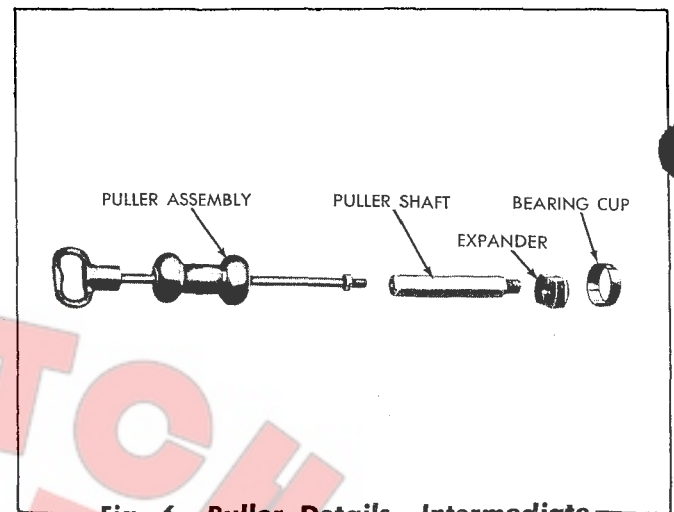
Puller Details—Intermediate Shaft Inner Bearing Cup
